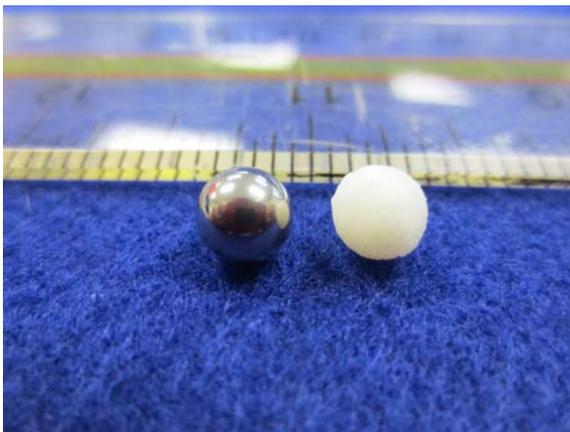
Prototype bearing balls: in-place fabricated (right); commercial stainless steel balls (left)
